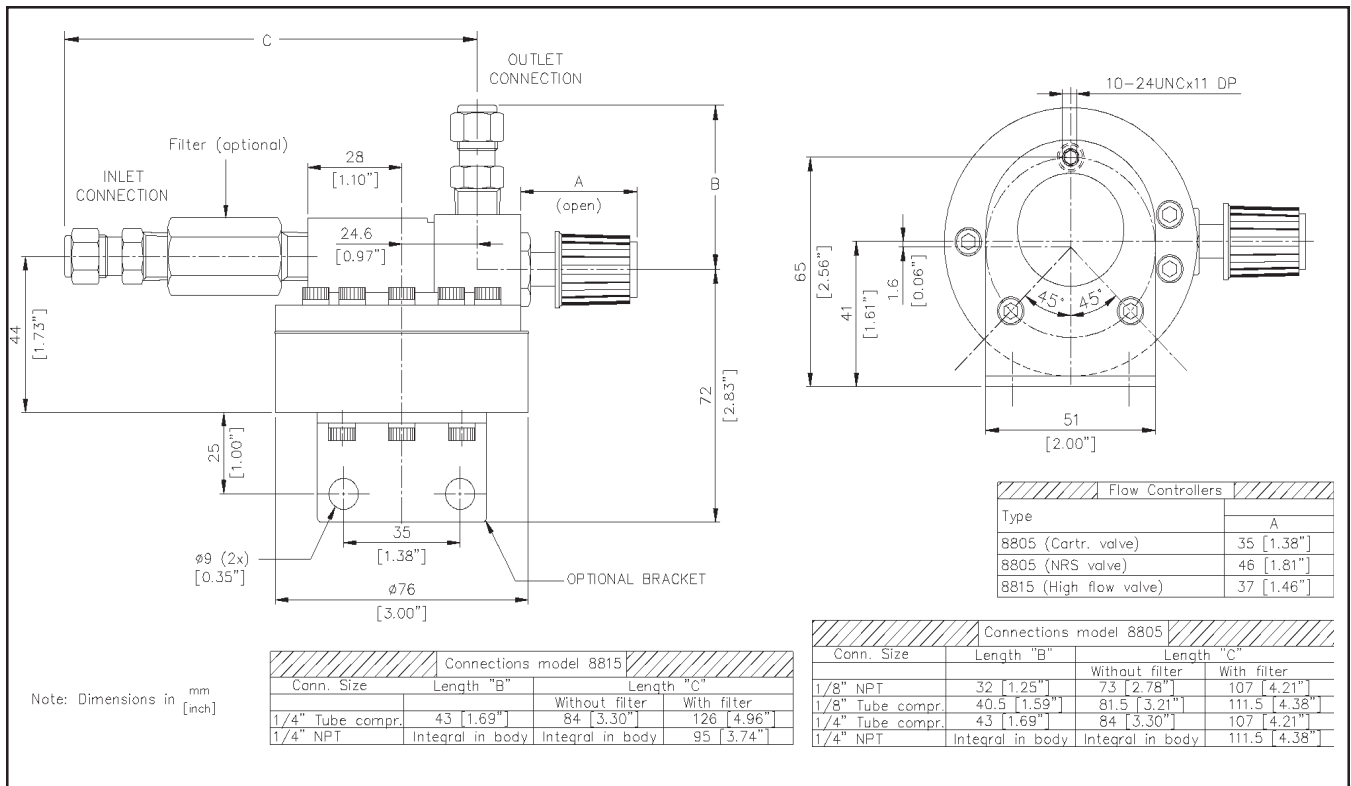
Dimensional Drawing Models FC 8805 and 8815
